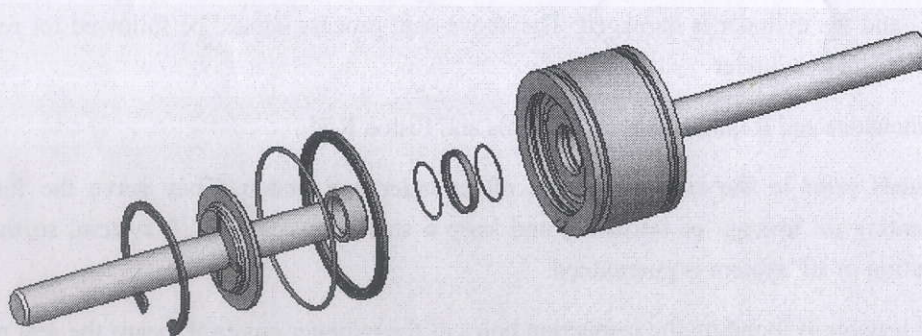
Exploded Diagram of Components of Piston and Piston Rod
